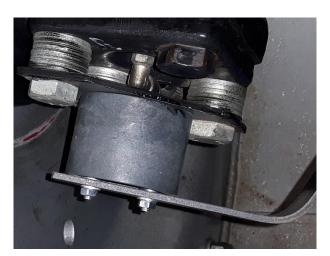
CORRECT MOUNTED WHEEL ANGLE SENSOR
